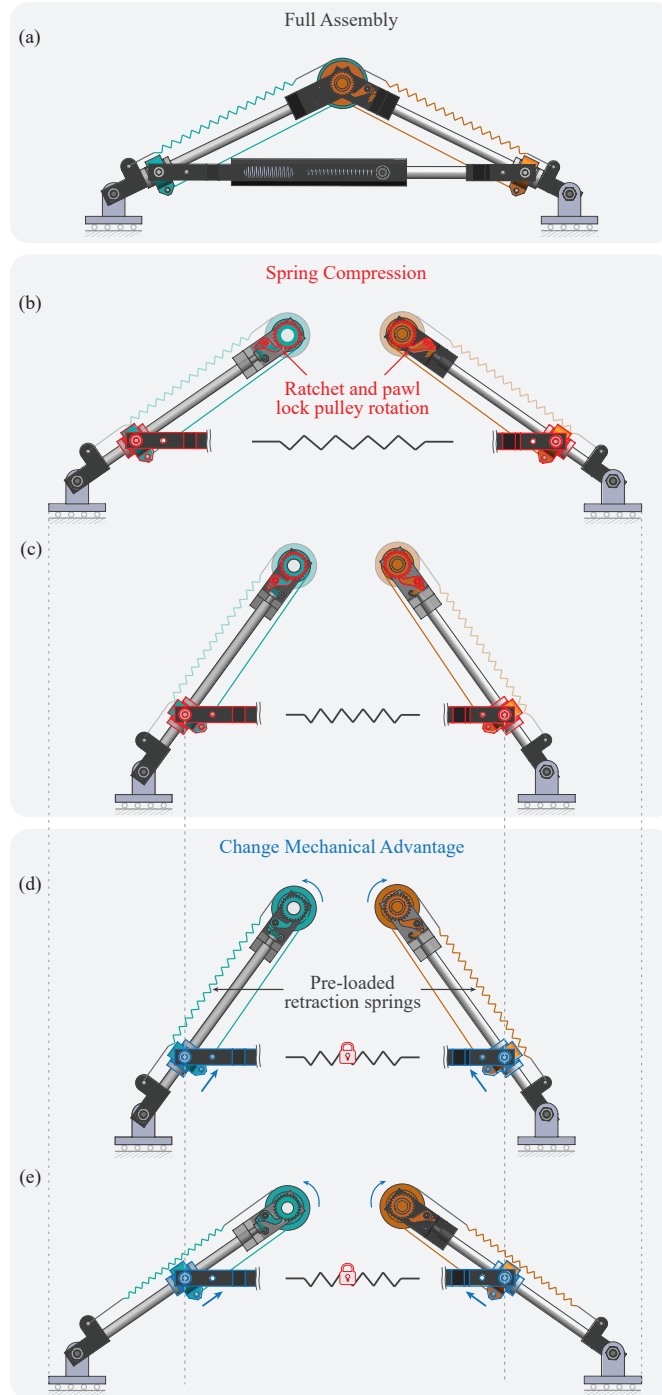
Compressing the spring and changing the mechanical advantage of the leg over the spring with the variable stiffness floating spring mechanism. (a) Front view of the CAD model. (b)-(c) Compressing the spring. During compression, the endpoints of the spring are fixed along the leg segments by locking the rotation of each respective pulley via a ratchet and pawl. (d)-(e) Changing the mechanical advantage of the leg over the spring. To change the mechanical advantage, the mechanism extends back to its initial configuration with the spring locked, allowing the pre-loaded retraction springs to rotate each pulley and simultaneously retract the spring endpoints towards the knee.
